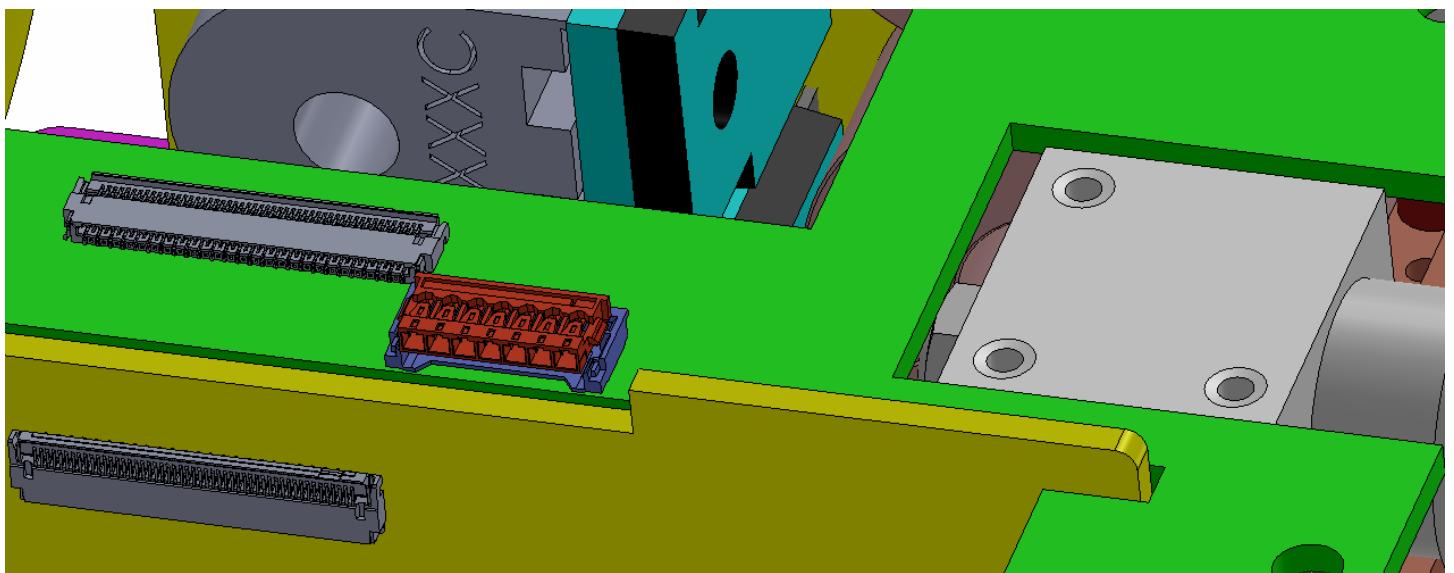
During testing, there is an additional cable which must be connected. A wire harness of 7 pins with 78172-0410 Crimp terminals must be inserted into the 78172 Pico EX mate Crimp housing, and the housing must be connected into the Top Board. This connection is for all ground testing at NASA Goddard's Facilities, as a CubeSat Bus is not present. This can also act as a backup in case I2C is not working properly with the system.
